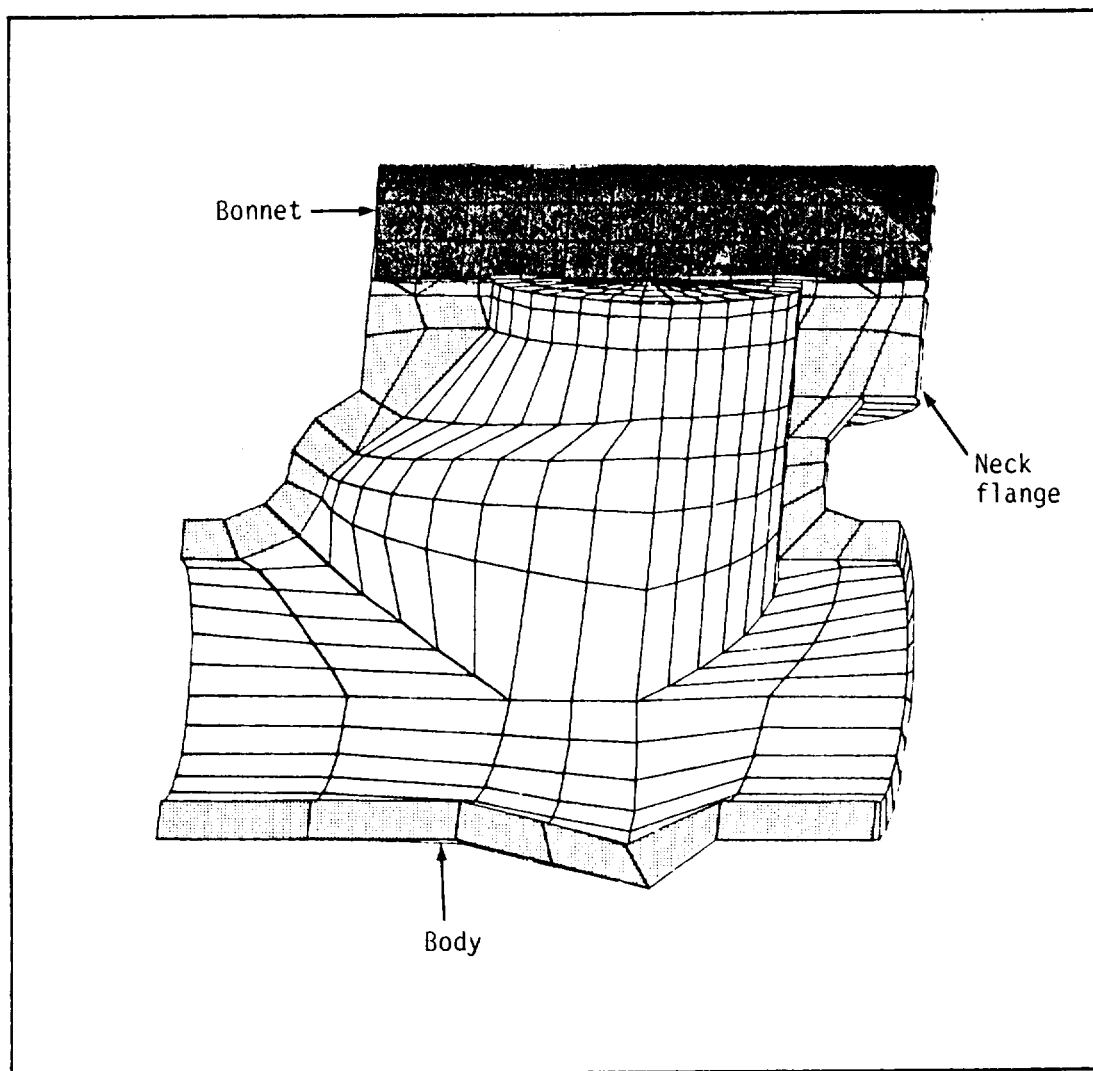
Ten-Inch (25 cm) Check Valve Model
